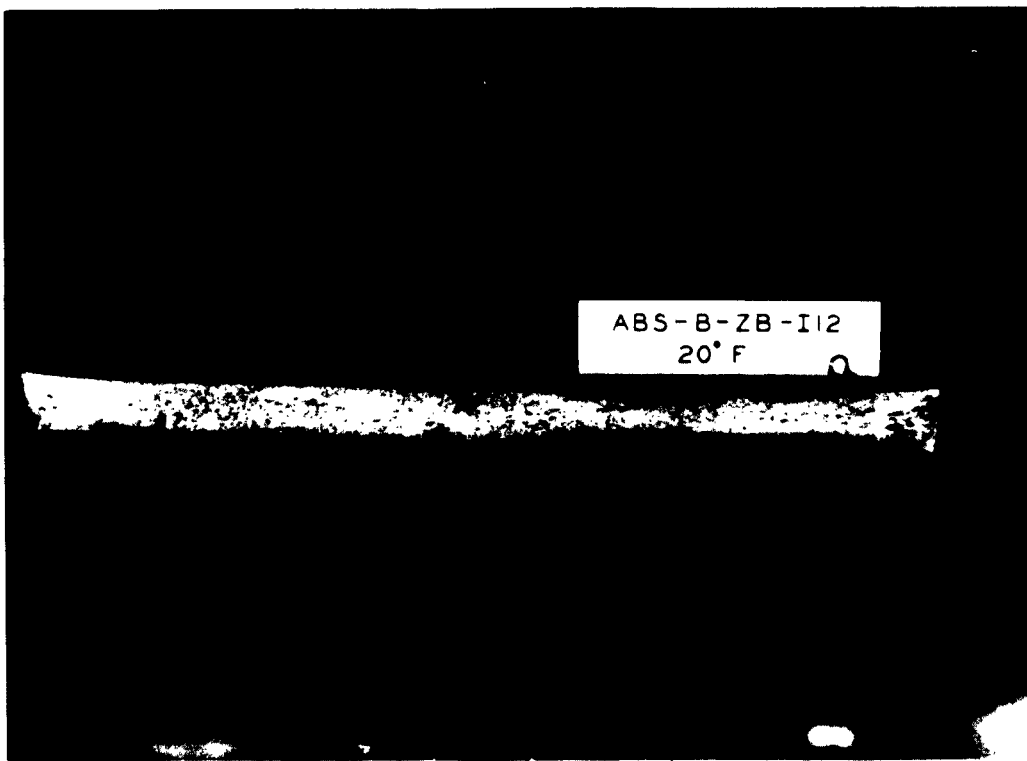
Shear Fracture at Toe of End Fillet Weld
